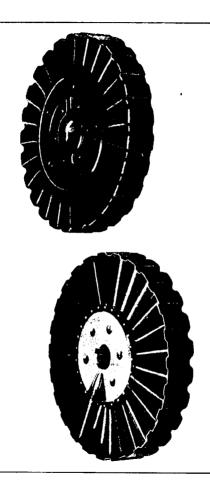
PLATE VII-MAGAZINE-TOP VIEW AND BOTTOM VIEW
